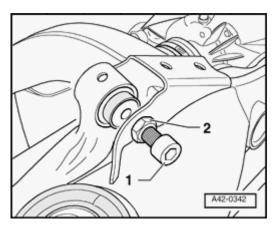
Install Cylinder Bolt & Nut Courtesy of VOLKSWAGEN UNITED STATES, INC.
